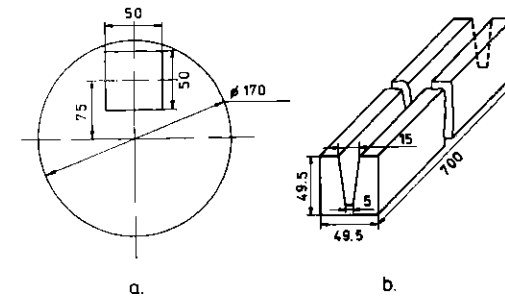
Sketch and dimensions of the SNC rotor (a) and rotor insertion (b).
